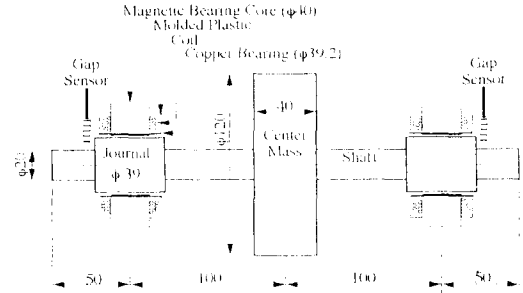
Configuration of Rotor System Supported by Hybrid Bearings.
